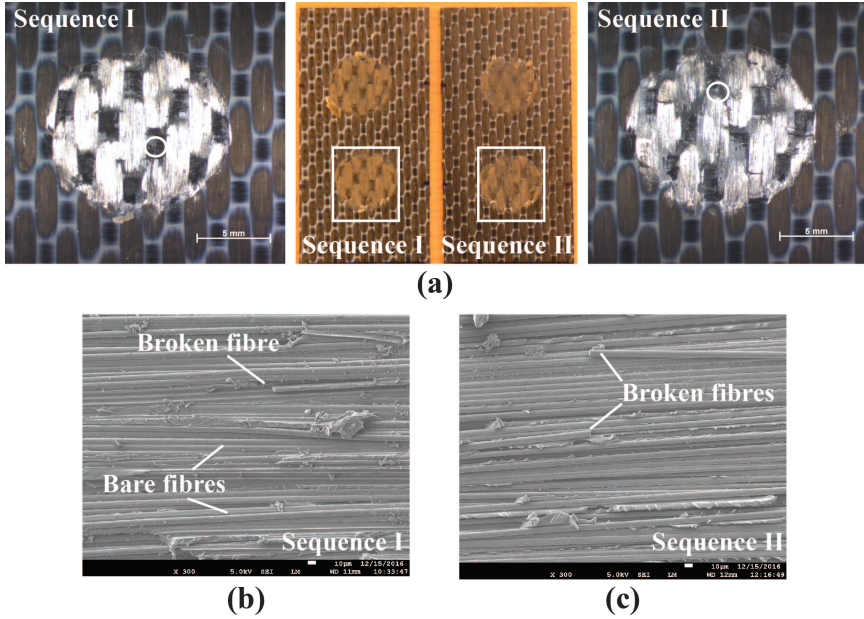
(a) Representative fracture surfaces of the 2SW joints manufactured following two different welding sequences at 0.23 mm displacement, 60.8 μm peak-to-peak amplitude, 1500 N welding force and 1000 N/s increasing force during the vibration phase. SEM micrographs (b) and (c) show the details of the areas circled in the fracture surfaces of samples welded following Sequence I and II, respectively. The scale bars are 5 mm (for microscopy) and 10 μm (for SEM).
